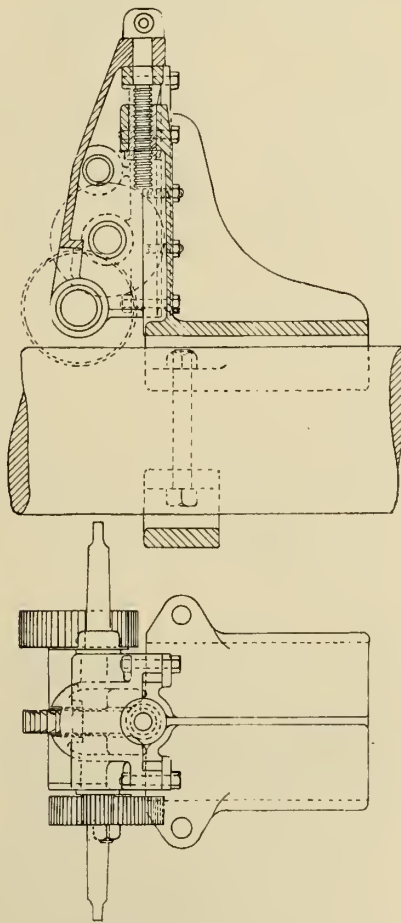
Arrangement of Keyway Cutting Machine for Driving Axle.
